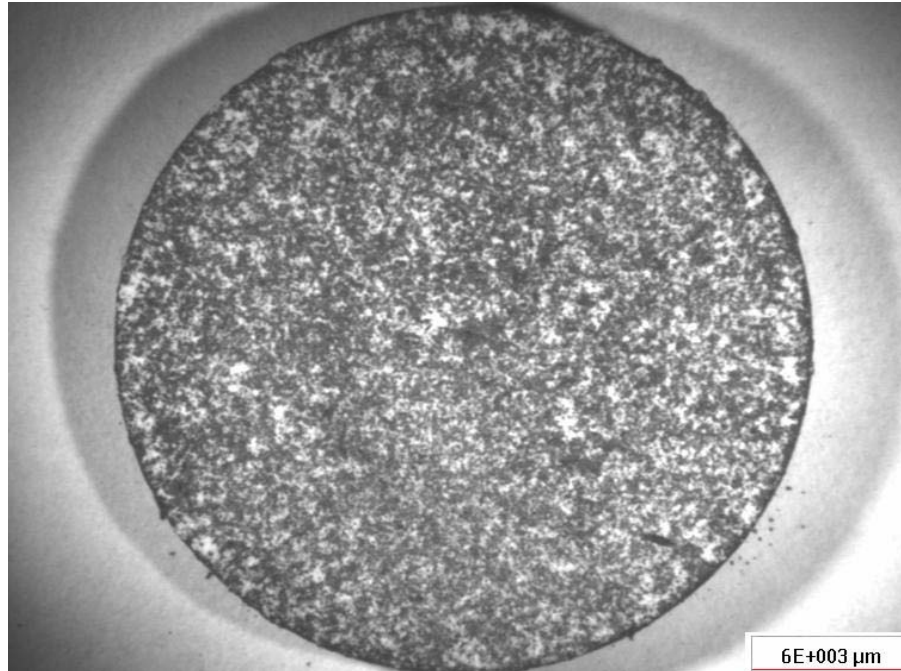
Fracture surface of the 15 mil specimen exposed in the pseudo-isothermal test.
